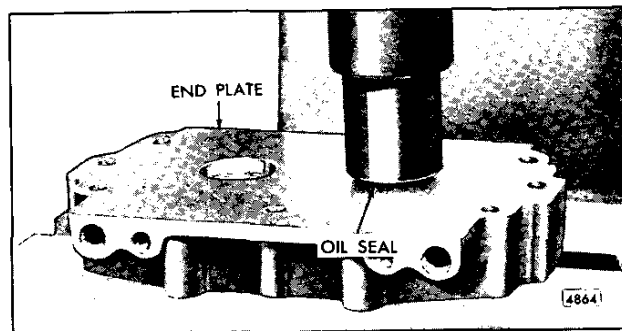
Installing Lip Type Oil Seal in End Plate with Tool J 22576
